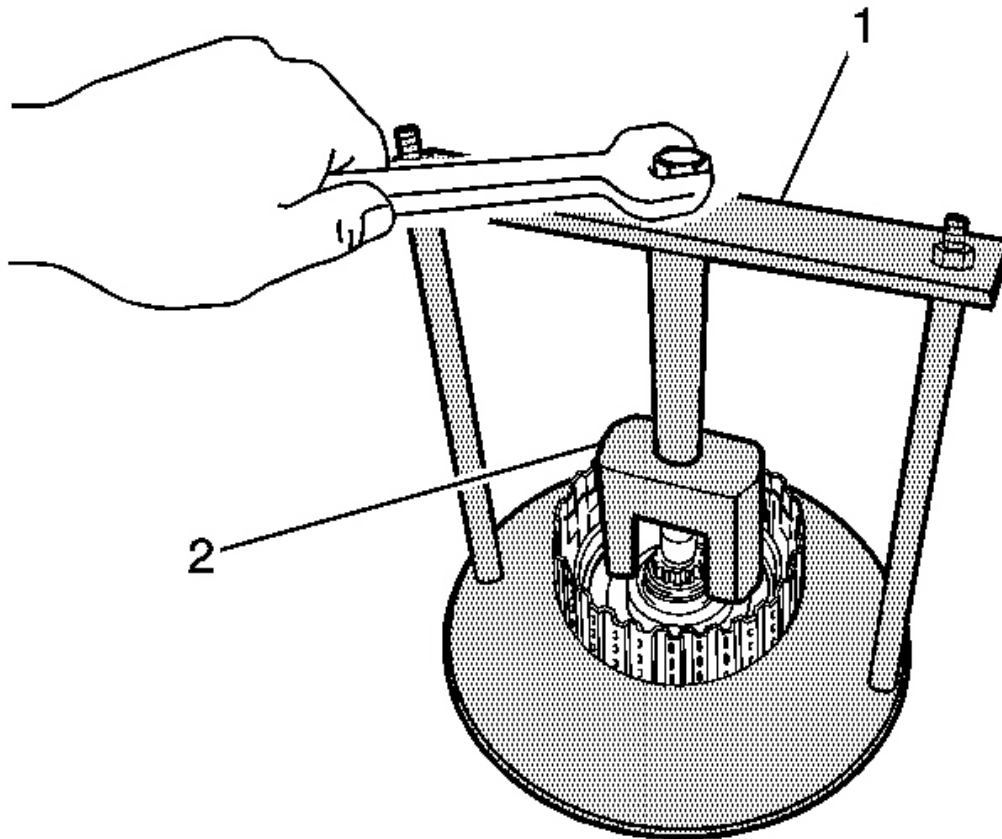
Compressing Spring Using DT 46451 & DT 46452
